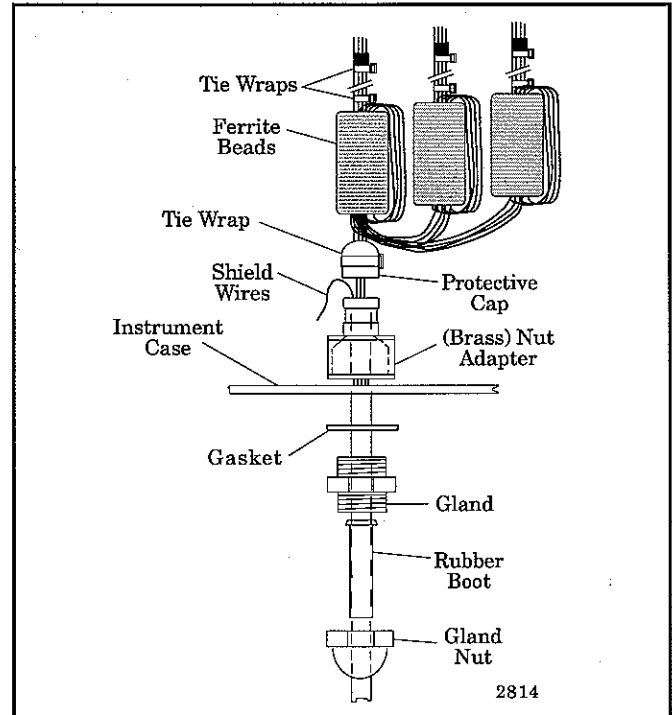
INSTALLATION OF LOAD CELL CABLE
